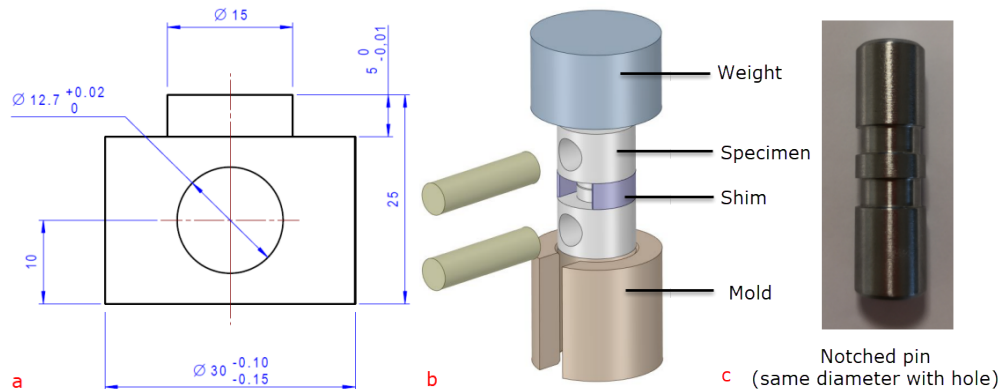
Specimen dimensions (a), curing assembly (b) and notched pin used in tests (c).
